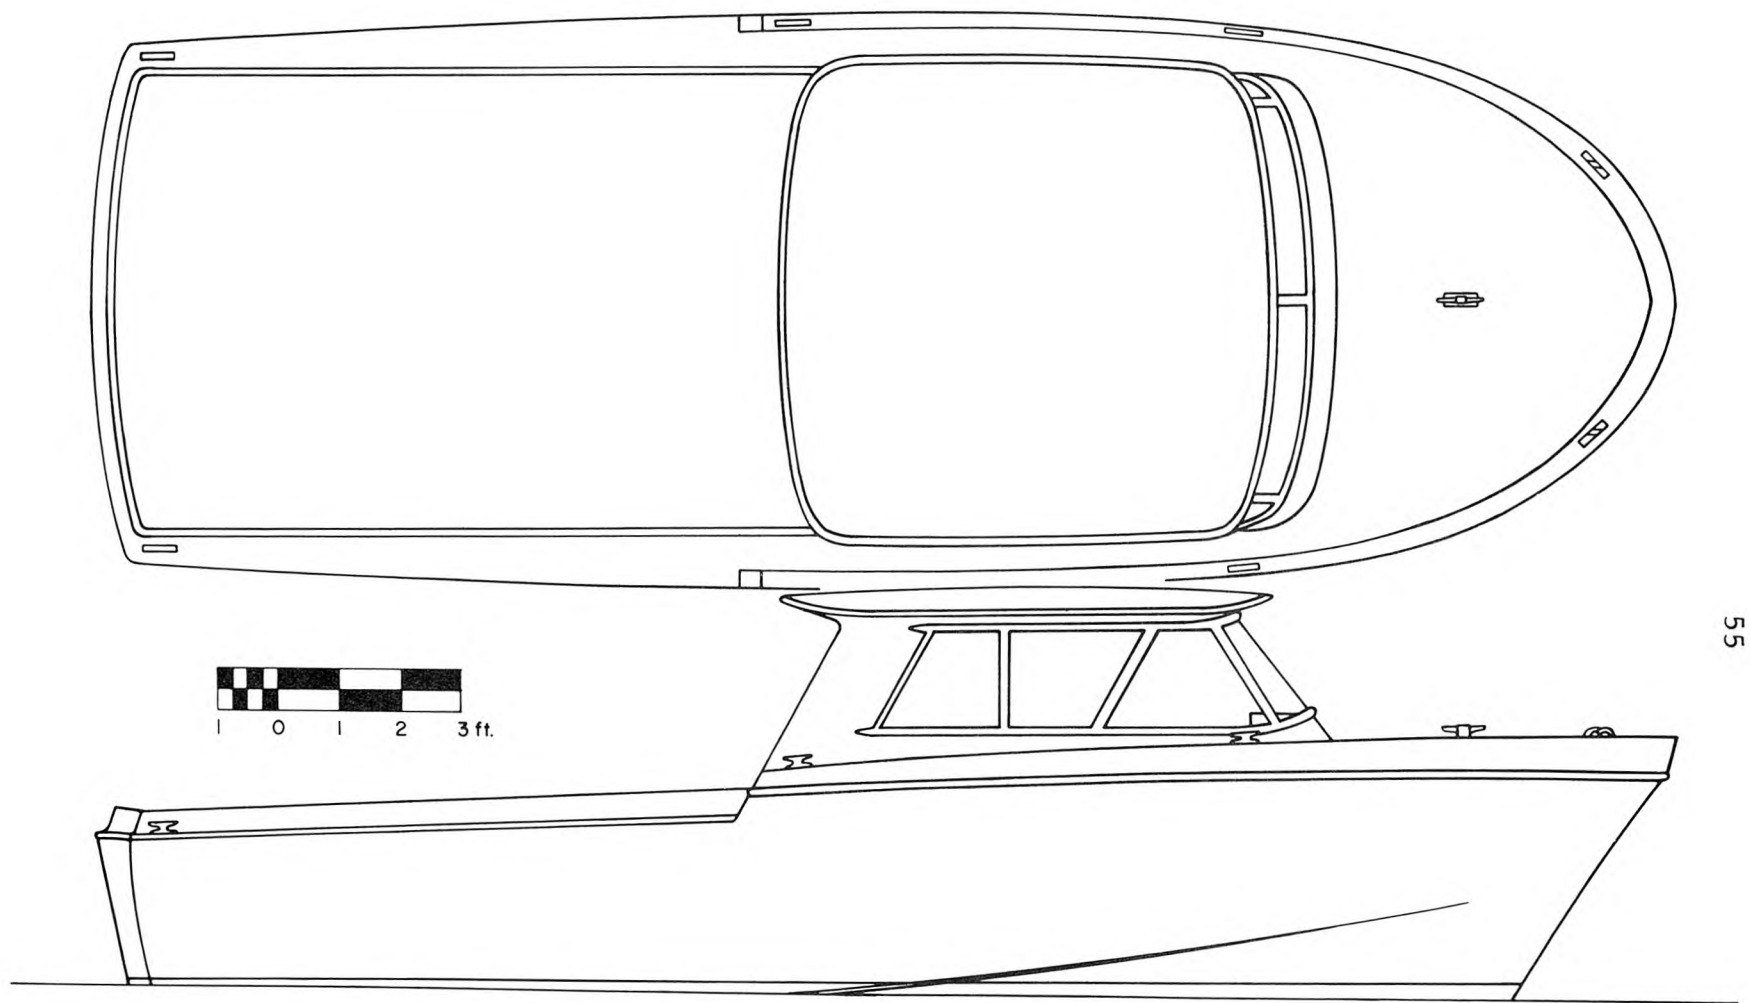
Plan View and Elevation Drawing of Harbor Boat No. 3
